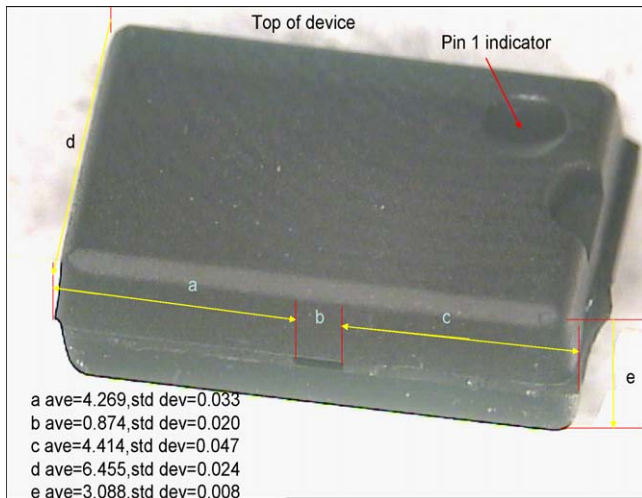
Mold compound PDip dimensions units are in millimetres.
